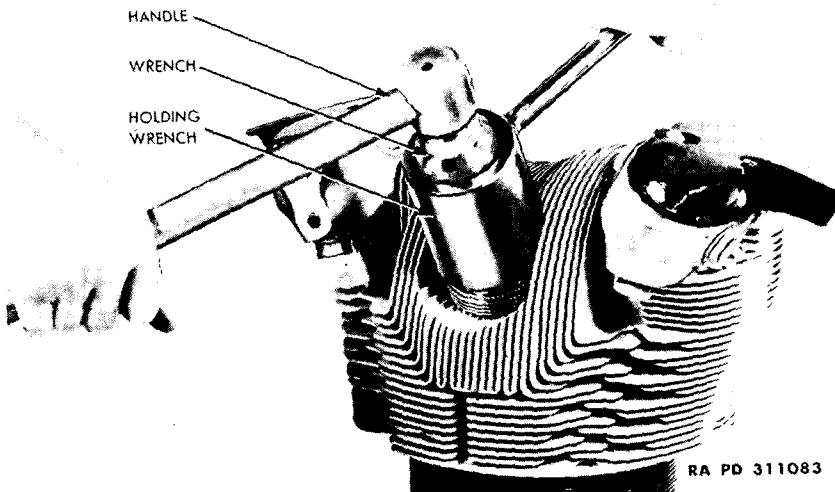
Removing Fuel Injection Valve, Using Wrenches 5A1943 and 5A2167
